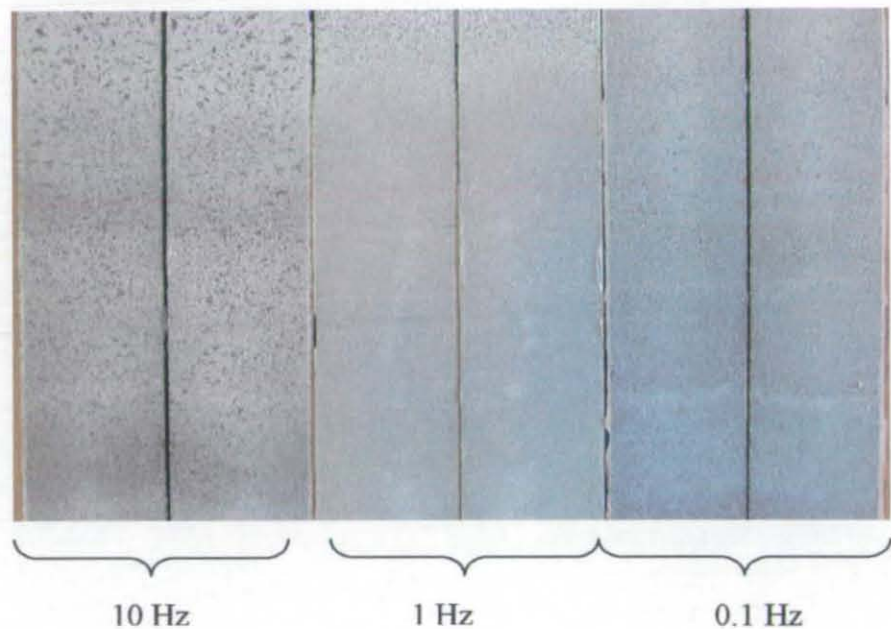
Image of failed test specimen of mild steel joints tested at 120°C.
